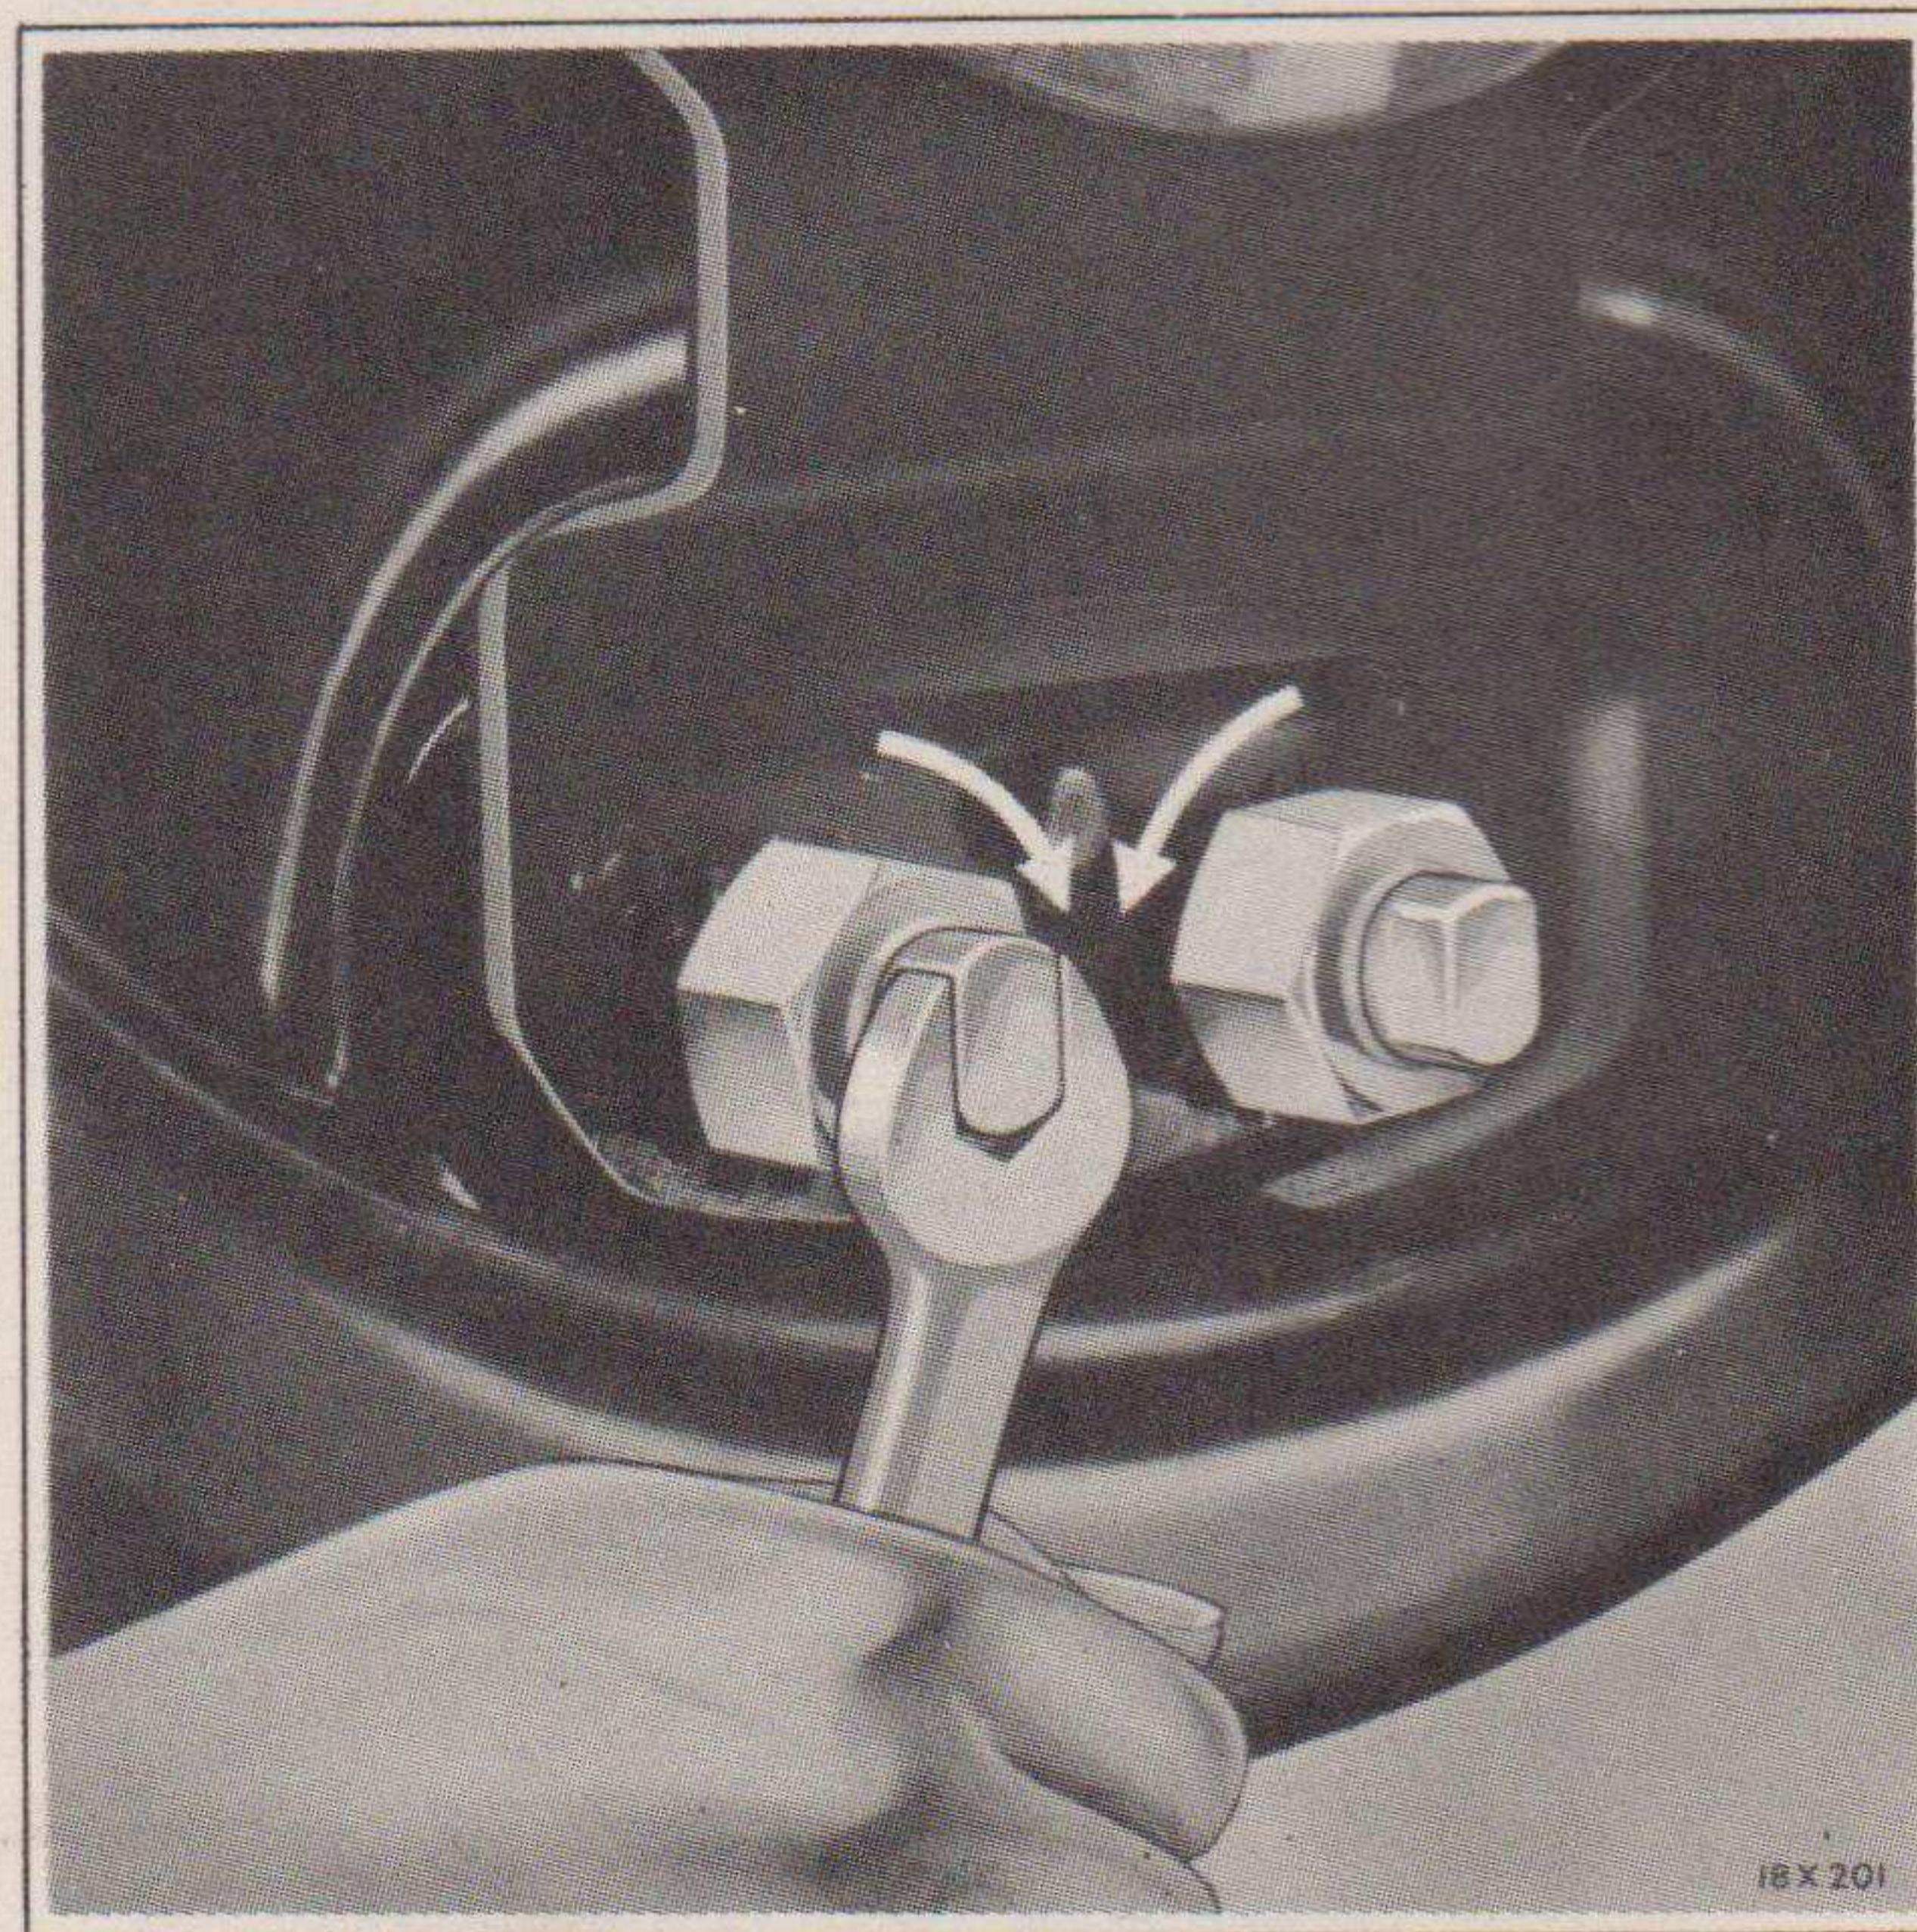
Brake Shoe Anchor Bolt Adjustment
